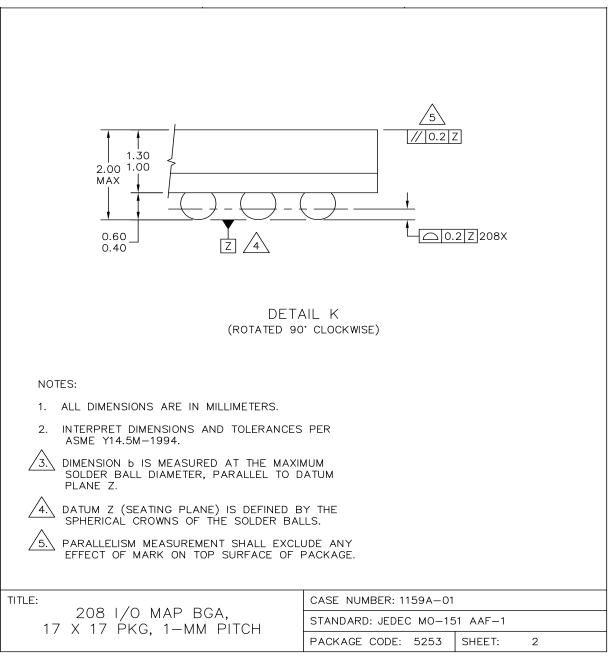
208 MAPBGA package mechanical drawing (part 2)
